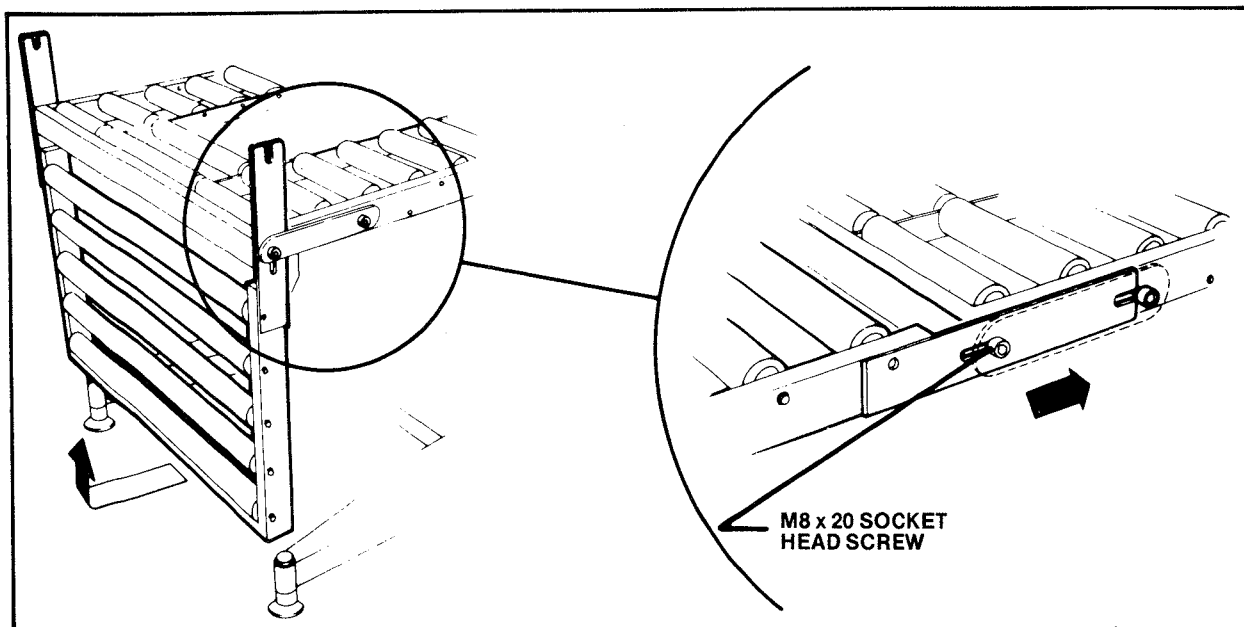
INFEED CONVEYOR ASSEMBLY
